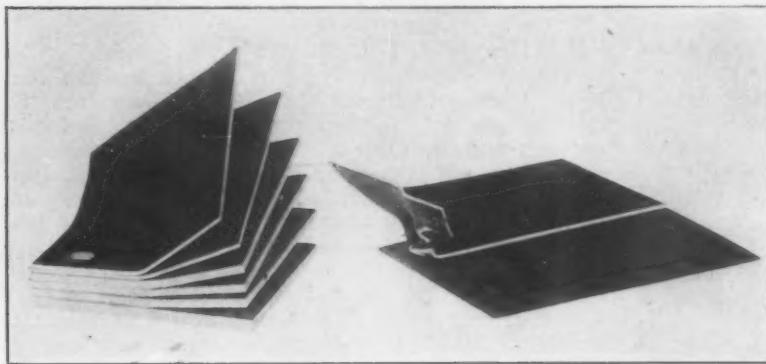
Six Sheets Electrically Welded; Proof of Fusing.
